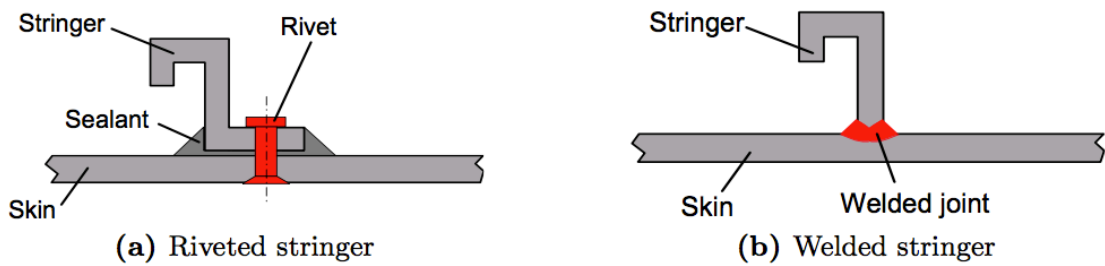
Riveted and welded stringer (3, p. 93)
